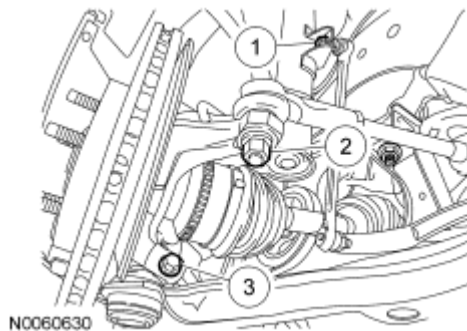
Identifying Sway Bar Link, Nut And Bolt
